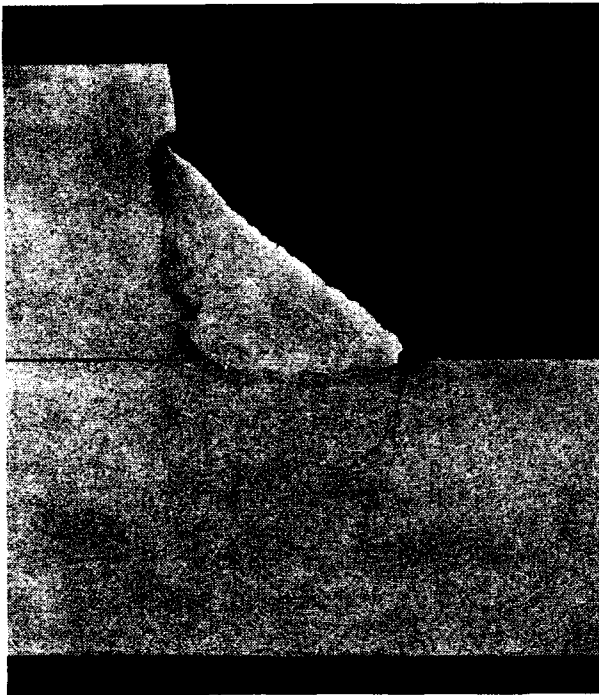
SECTION AT 6TH CIRCULAR SEAM OF FIRST ACCUMULATOR SHOWING SEAL WELD AND FISSURES
